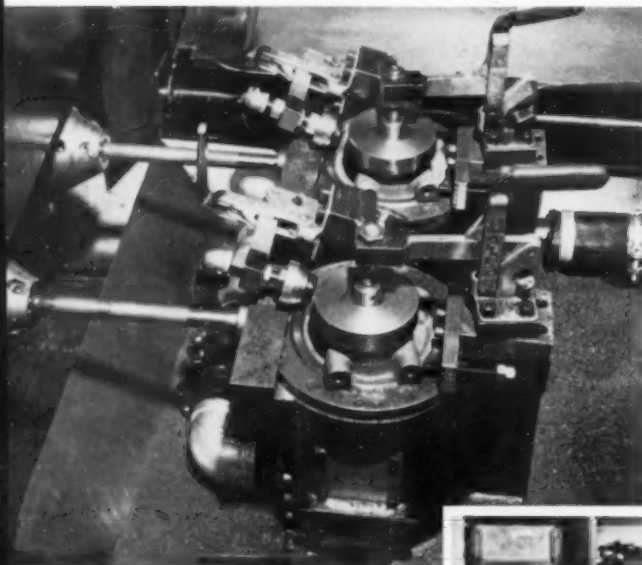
Setup for drilling cast-iron power steering valve bodies. Rubber stoppers prevent coolant from spraying into the part loading area.
